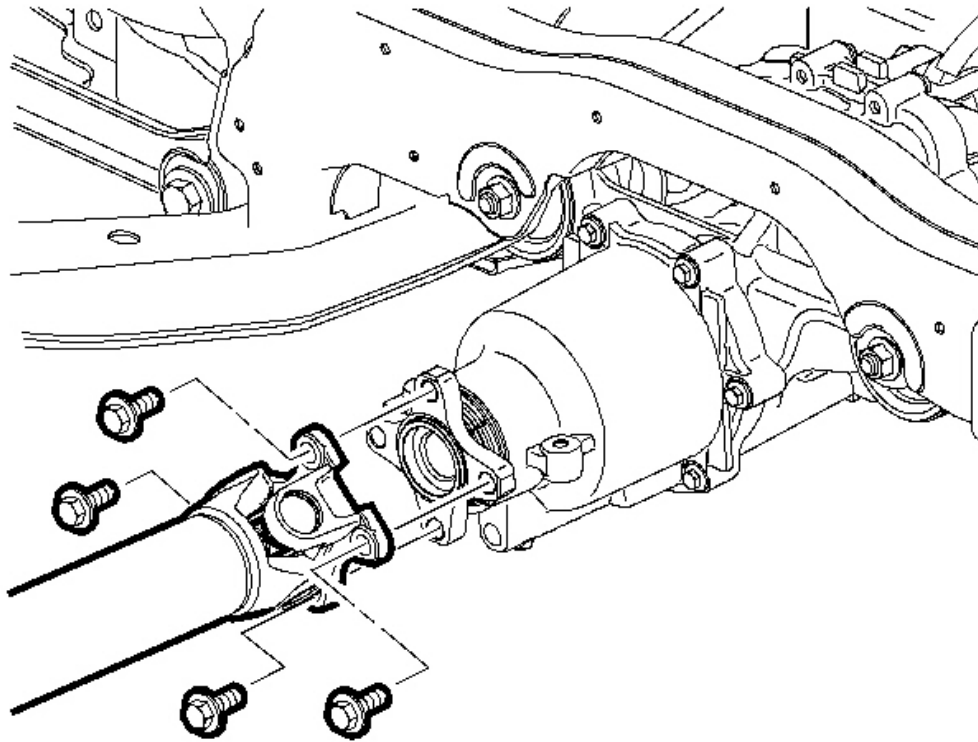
Removing/Installing Propeller Shaft Flange Mounting Bolts
